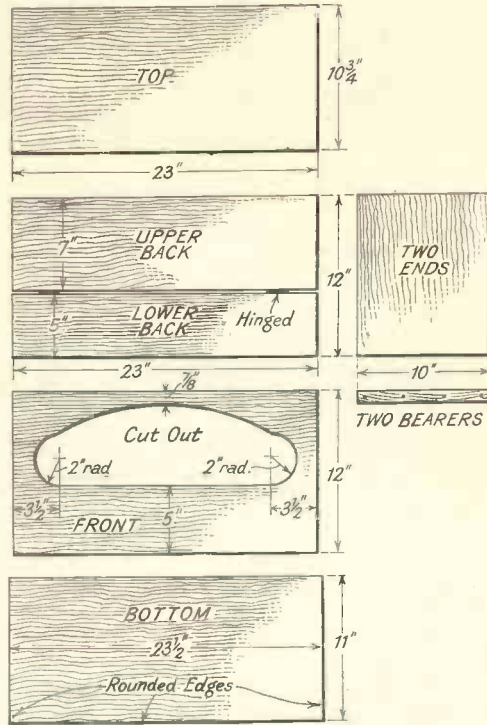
SHAPES AND SIZES OF PARTS FOR THE CASE.
